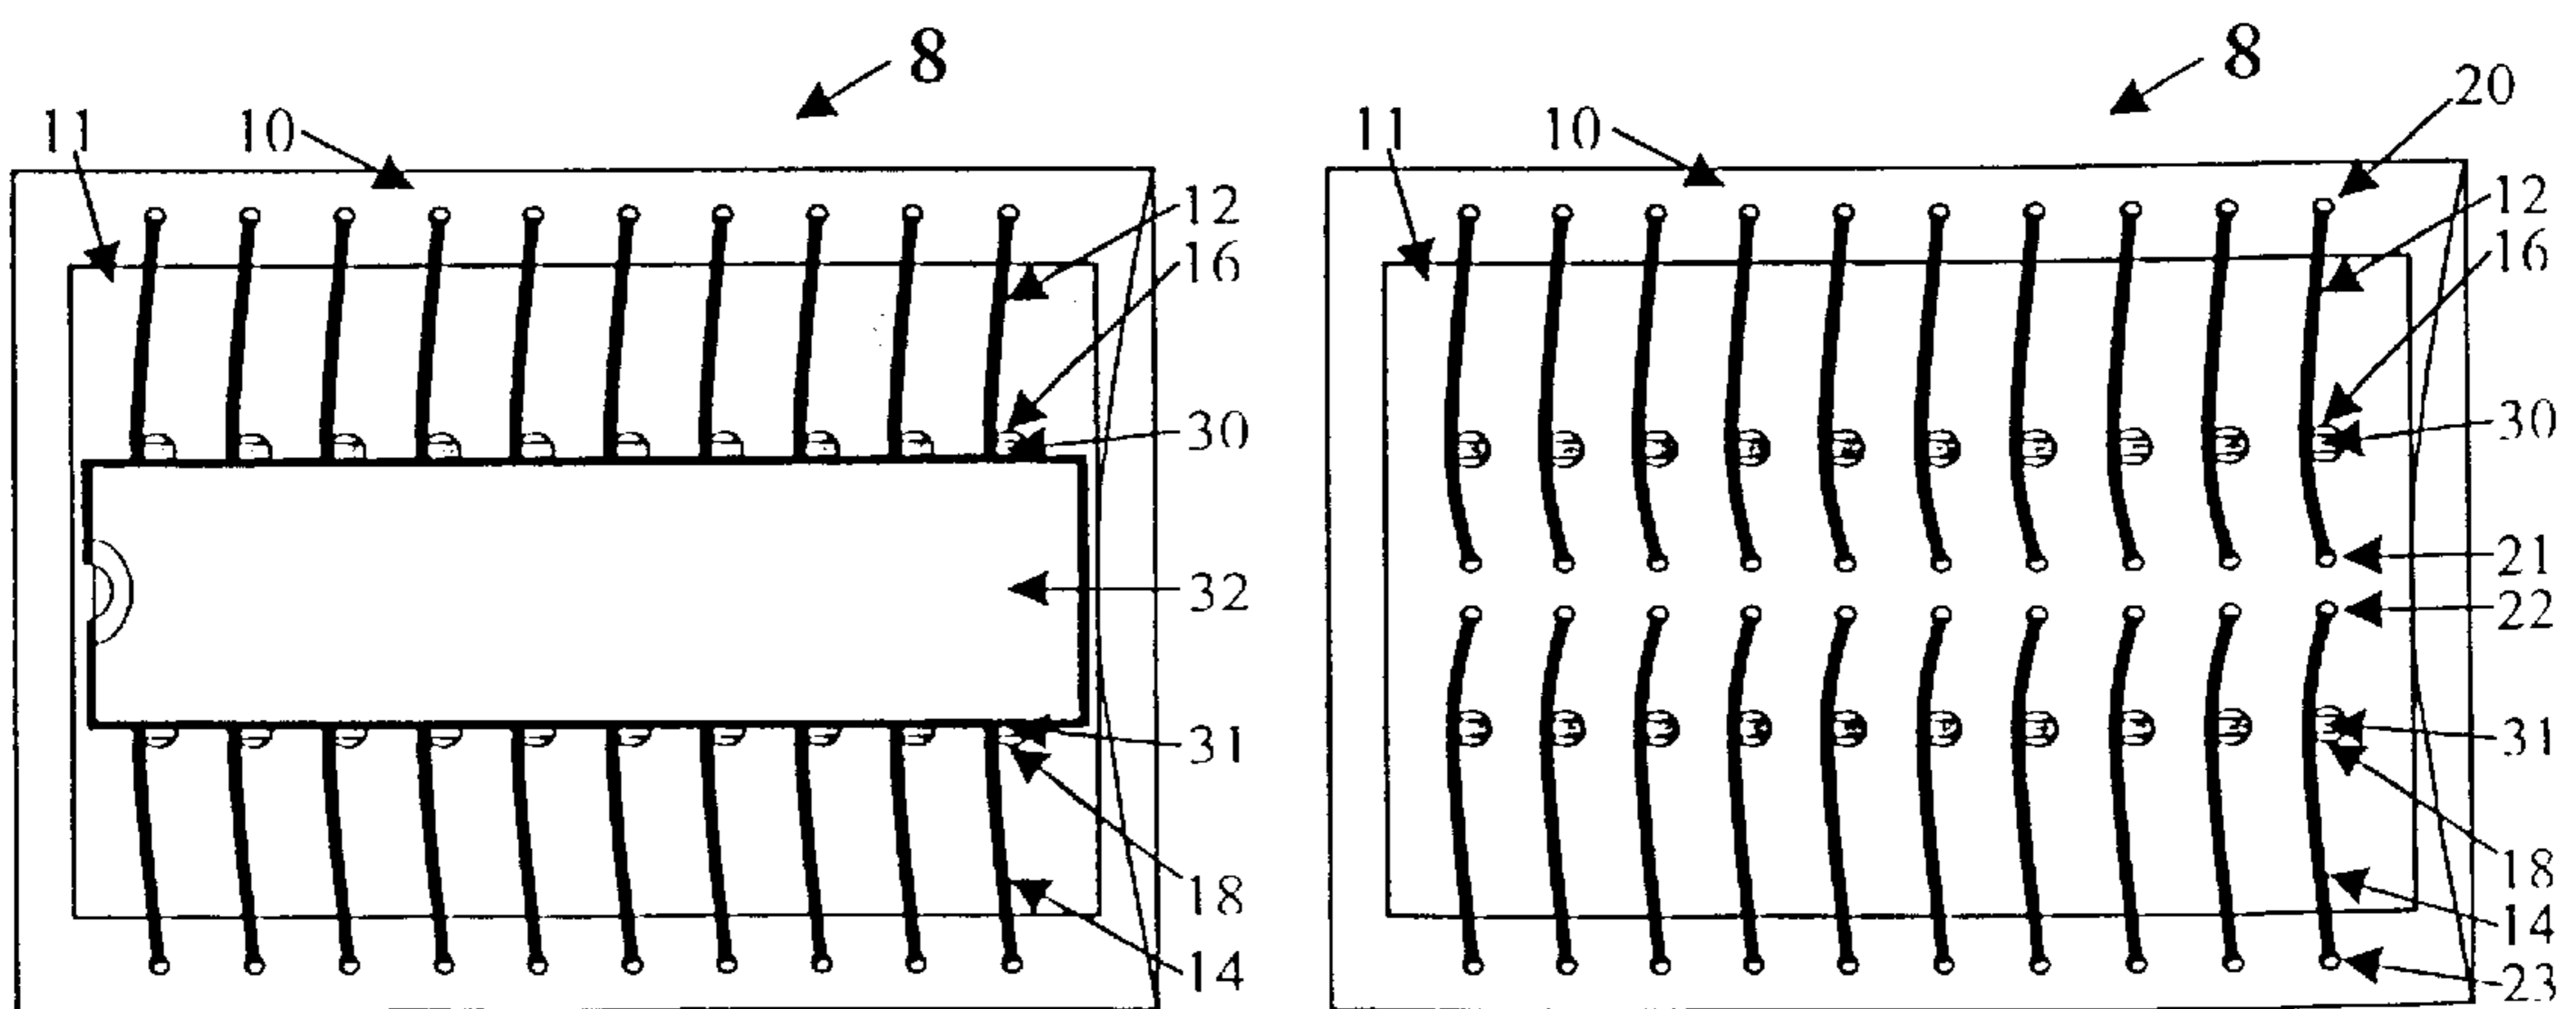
A: Engaged Position (UUT Body Shown) Fig. 2B: Engaged Position (UUT Body Not Shown)
